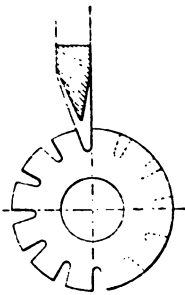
Cutting Backed Off Mill having Straight Teeth.
